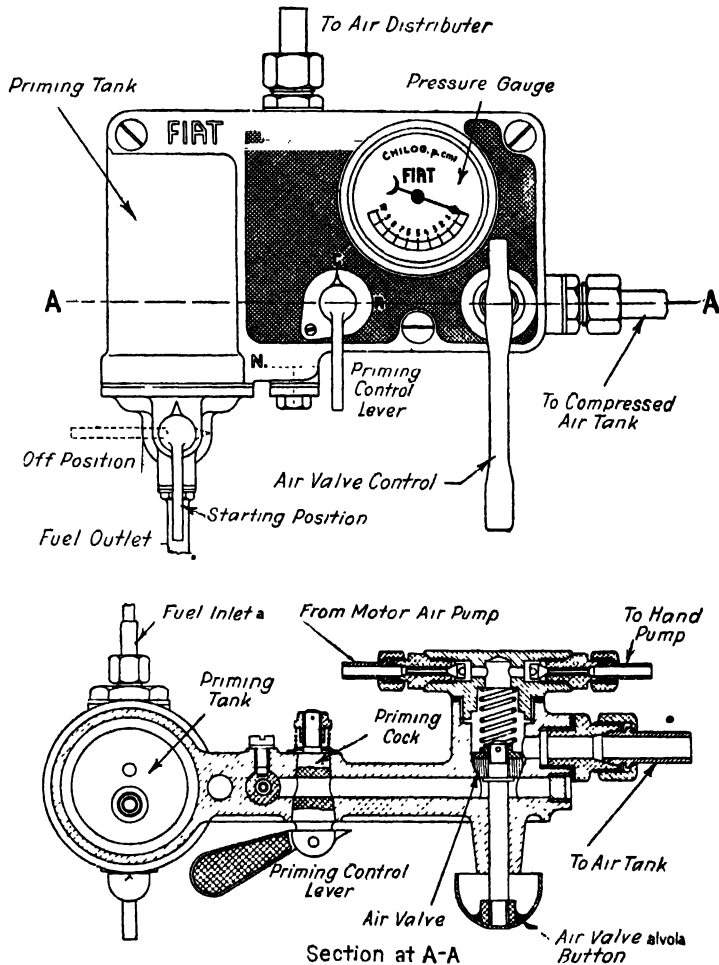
Diagrams Showing Construction of Fiat Air Starter Control Panel which Incorporates Priming Tank and Control Valves and Pressure Gauge.
